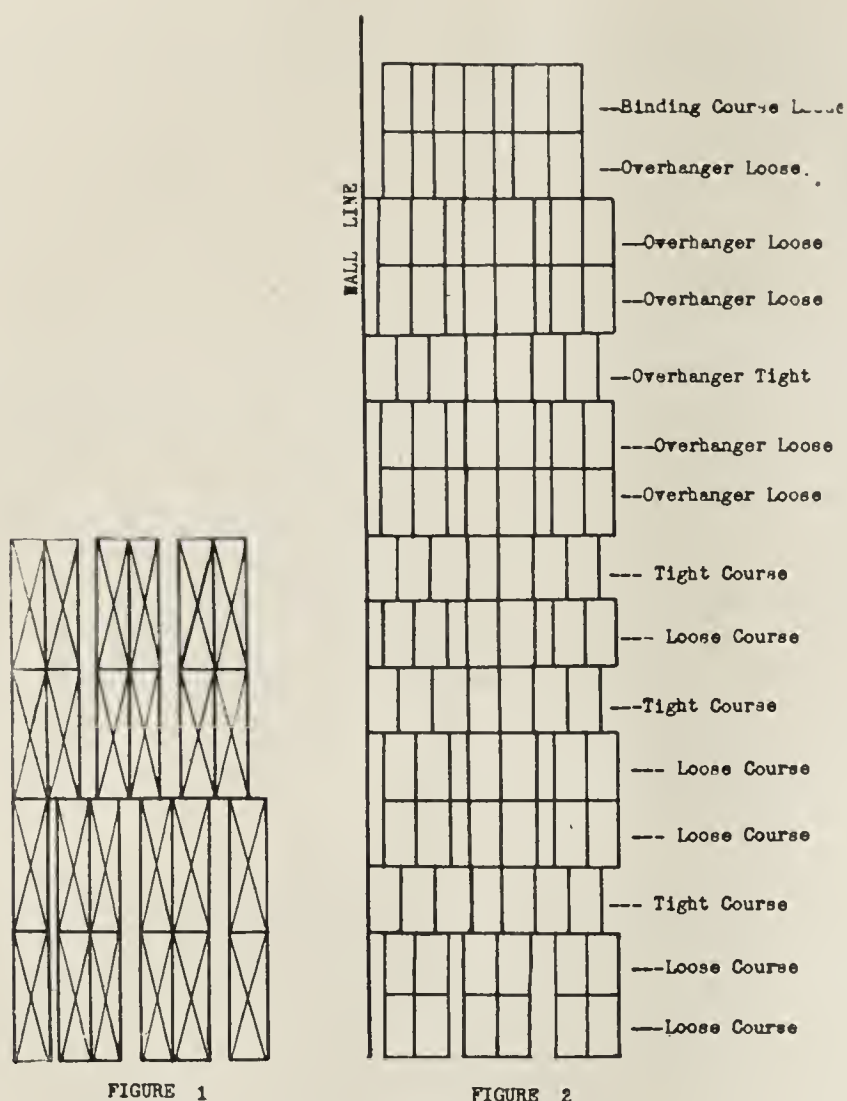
Shows Ground Plan of Arch in Scove Kiln. Figure 2 Shows Method of Setting Brick.
